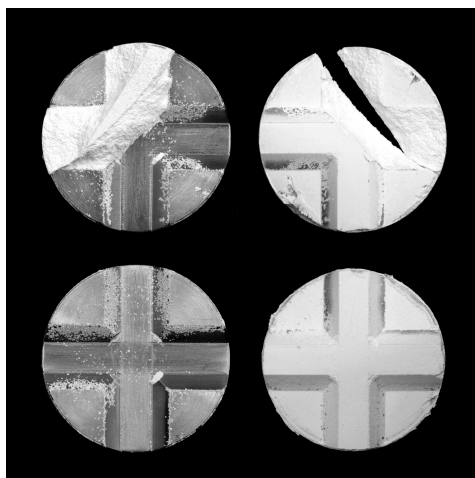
Cross-shaped (30 mm diameter) punch (left) and the formed pieces (right), broken (upper part) and intact (lower part) after ejection.
